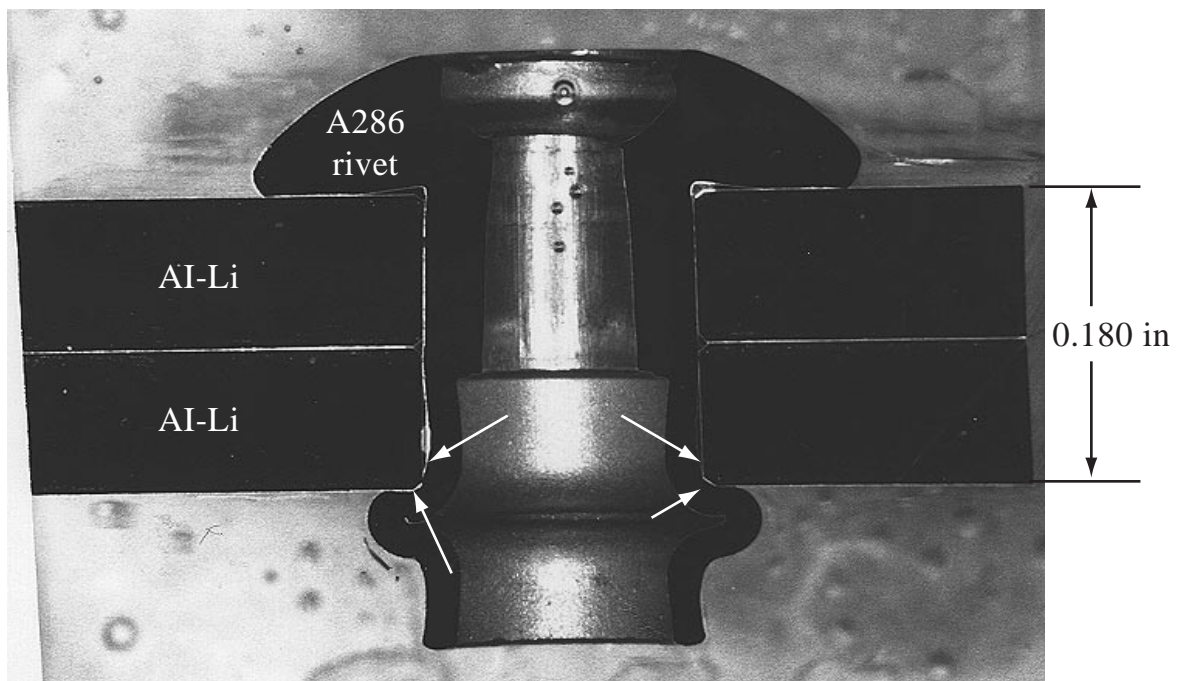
Longitudinal cross section of the riveted joint. White arrows point to the surfaces of the Al-Li alloy that were inspected for cracks.
